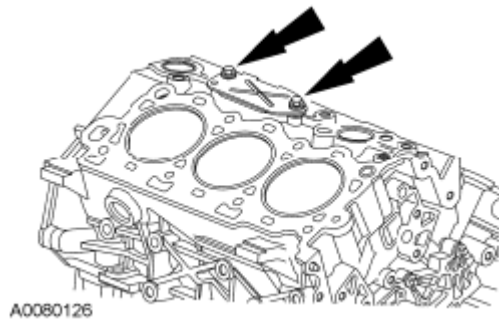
Locating Oil Separator Cover With Gasket & Bolts
